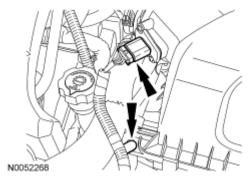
Locating Engine Breather Courtesy of FORD MOTOR CO.
